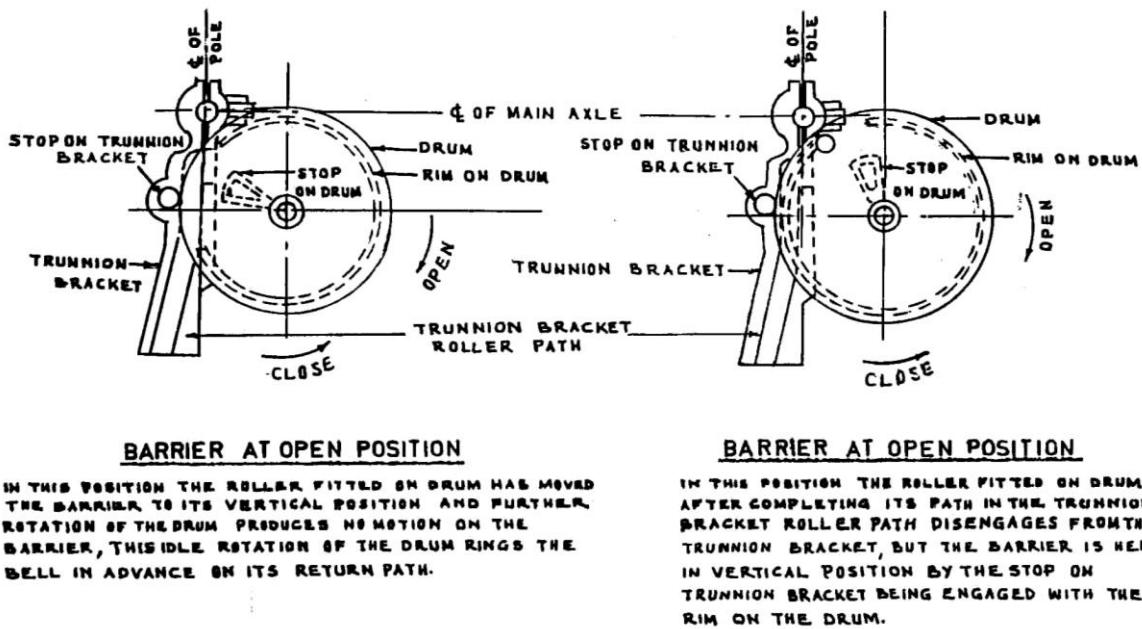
(h) LIFTING BARRIER WORKING ARRANGEMENT OF TRUNNION BRACKET & DRUM (SA 7997)
